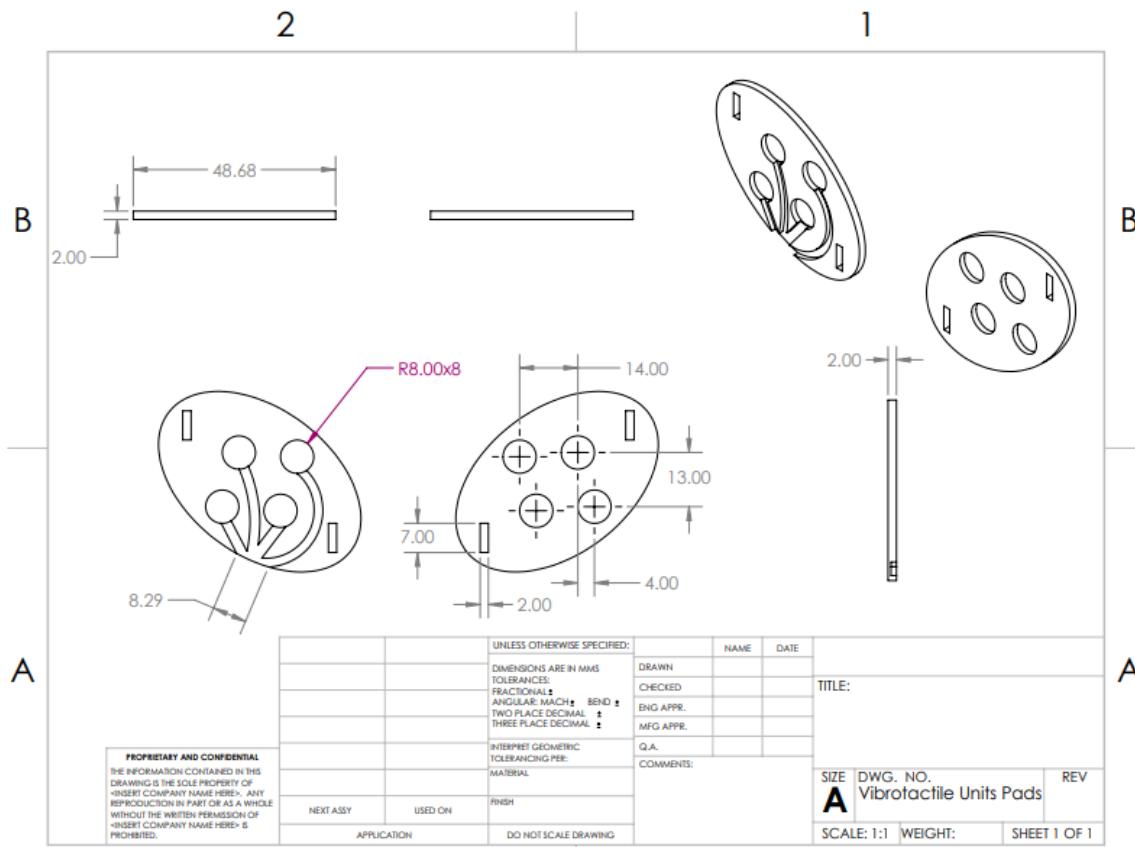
Engineering Drawing of Vibrotactile Units Pads
